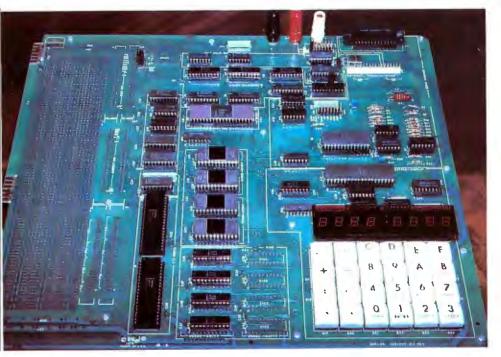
Assembled SDK-86 board. Note the prototyping area on the left-hand side.
